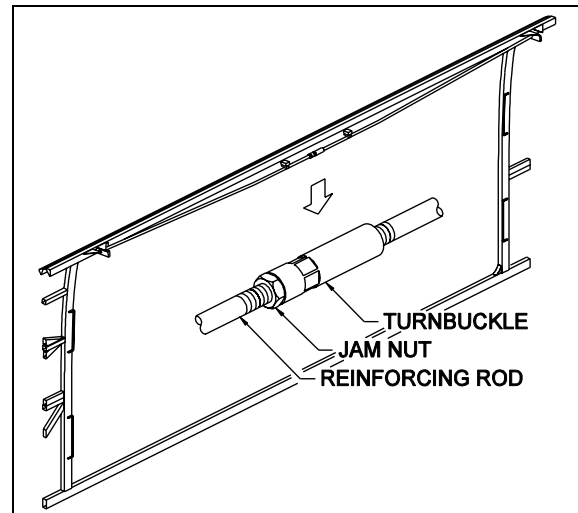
FRONT SLIDE-OUT ROOF REINFORCING ROD
